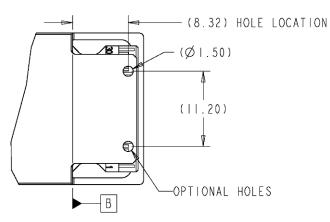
OSFP nose, bottom view, optional signal pad inspection holes
